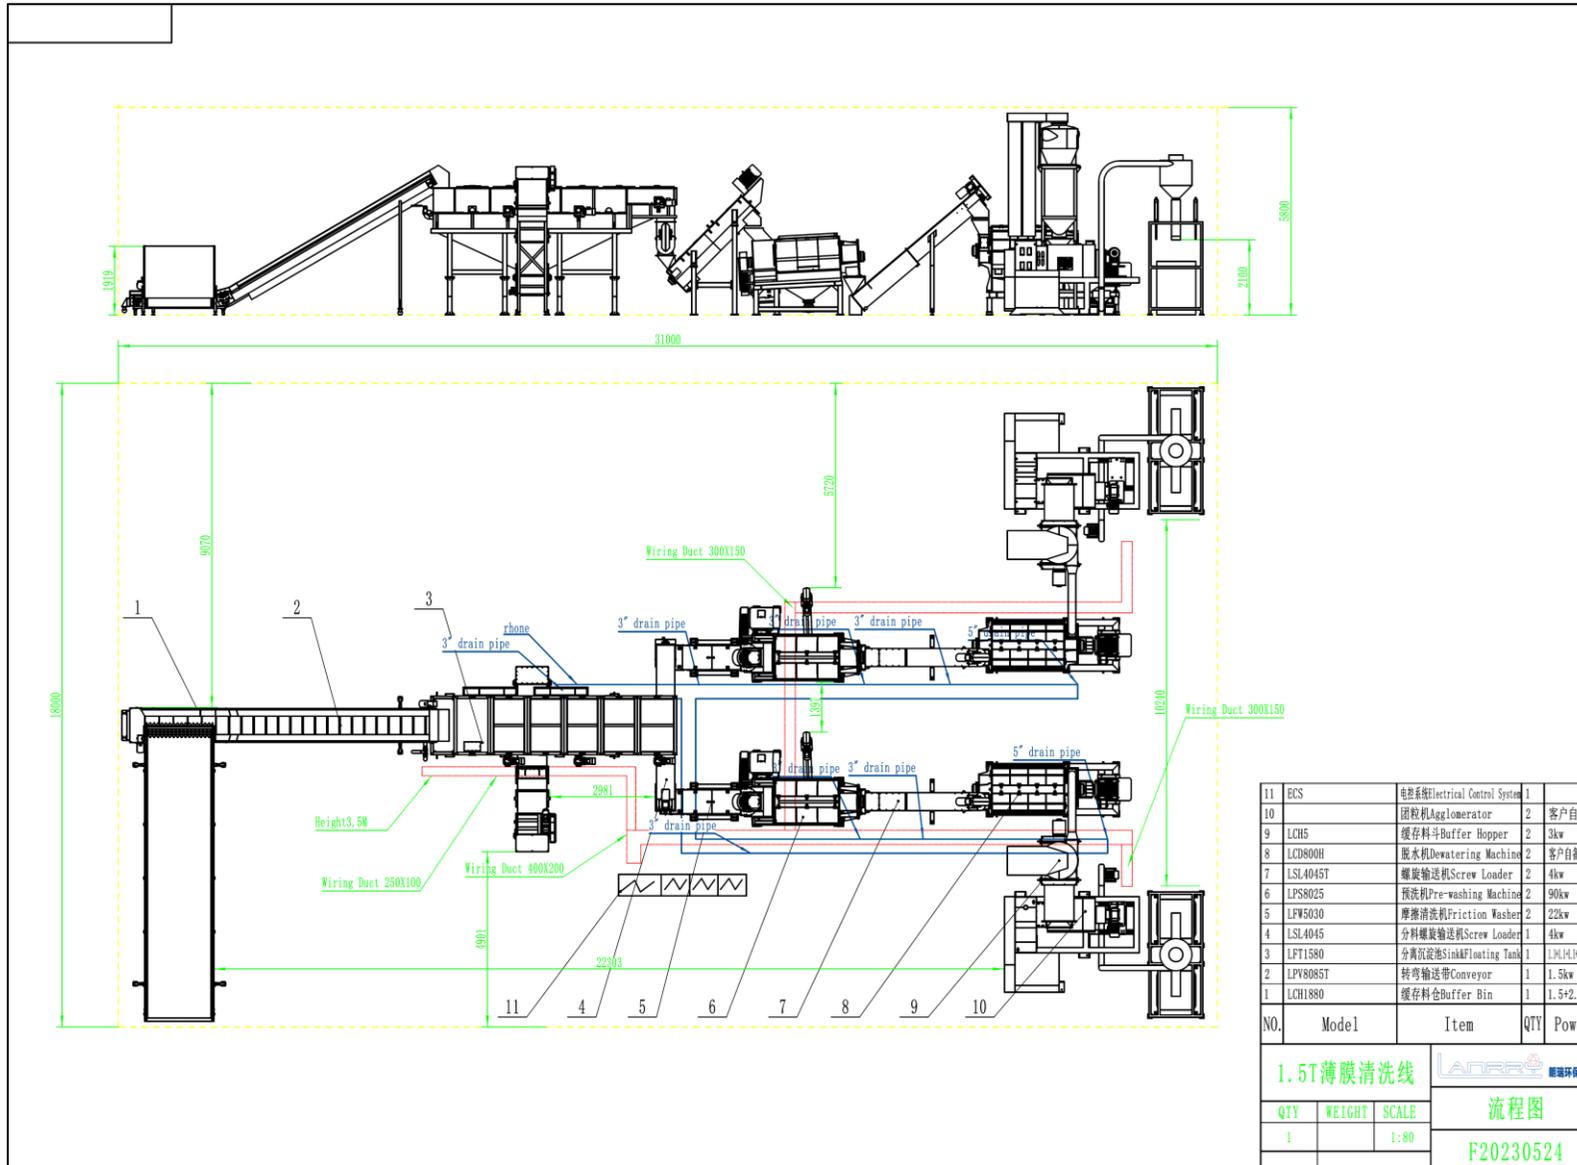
Plan and elevation drawing of the new LD plastic agglomeration plant to be installed at the former scrapyard
